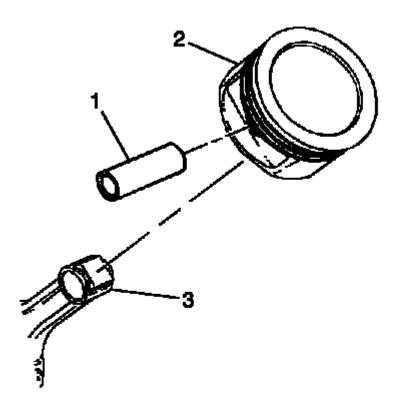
Piston Pin And Connecting Rod Courtesy of GENERAL MOTORS COMPANY
